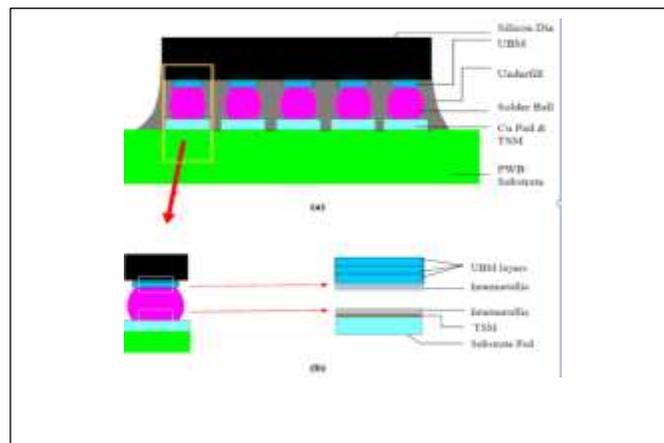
Example of flip chip on board a) cross section b) enlarged view of die
